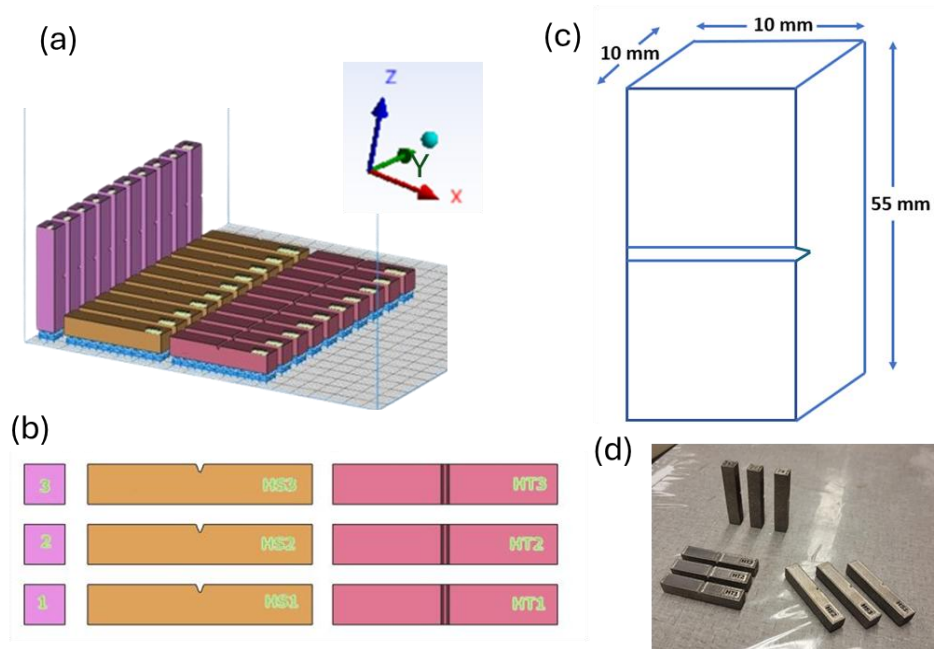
(a) Isometric view of Charpy impact specimens inside the build chamber, (b) Top view of the specimens showing three different notch orientations, (c) Dimensions of the specimen, (d) Few fabricated specimens
